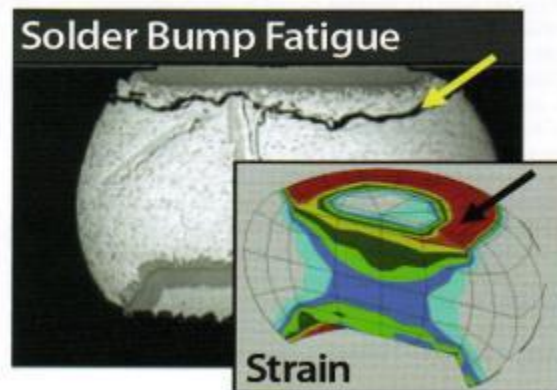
BGA Solder Ball Fatigue and FEA Fracture Model
